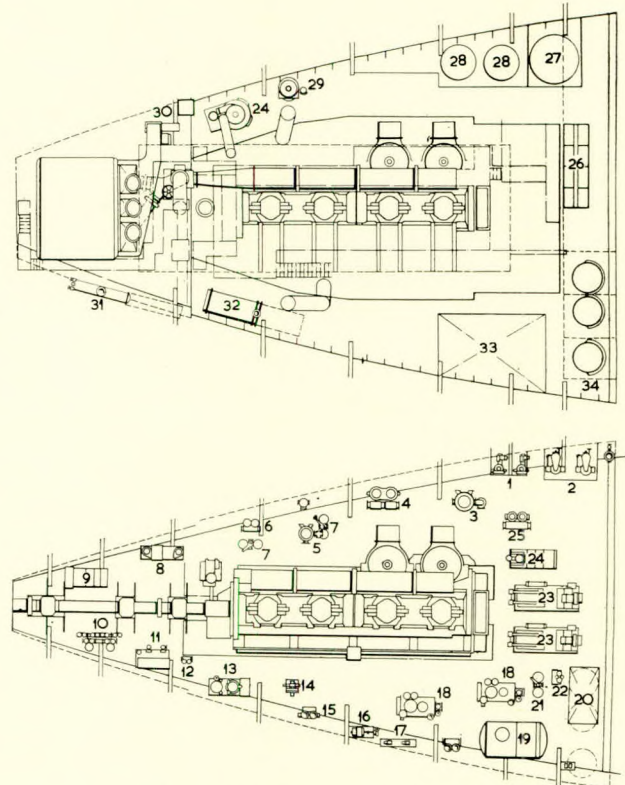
Arrangement of 20,000-s.h.p. machinery in a tanker. Plan view at engine room floor level
